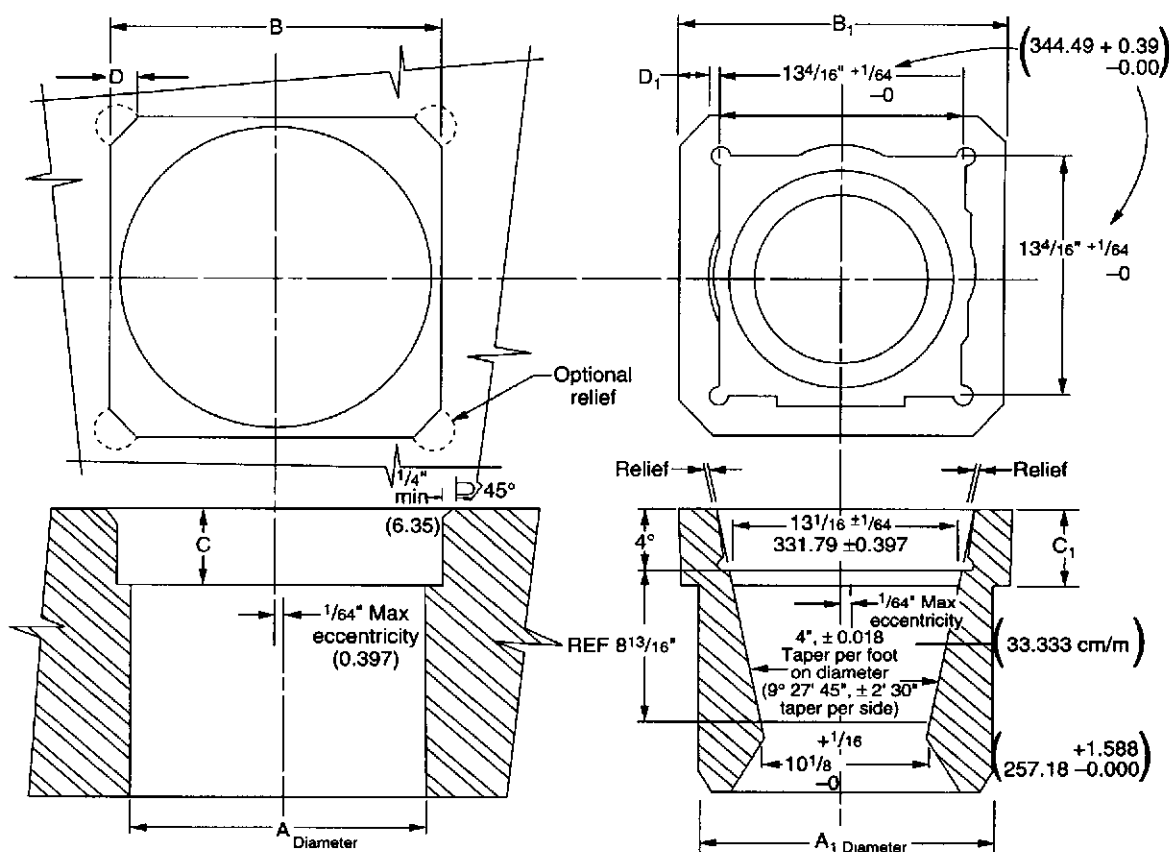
Rotary Table Opening and Square Drive Master Bushing
